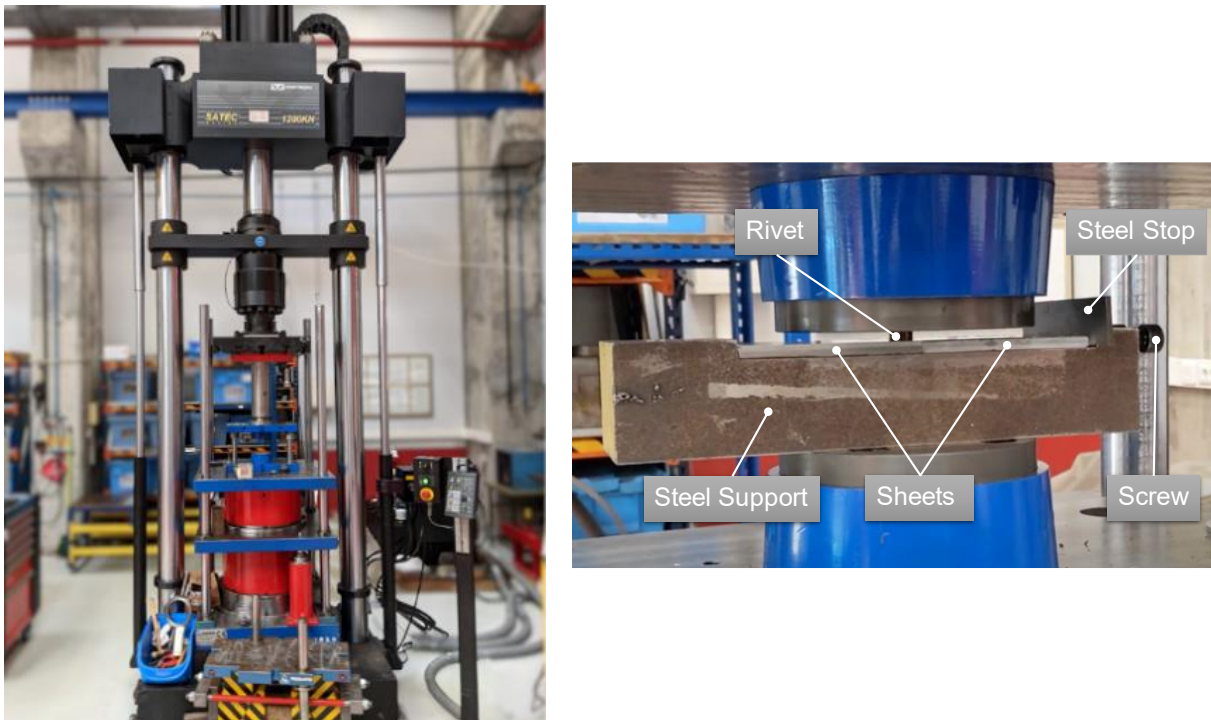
Riveting setup: at the left is the machine and plattens; at the right is a close-up view of the steel support with two aluminium sheets and the rivet positioned.
